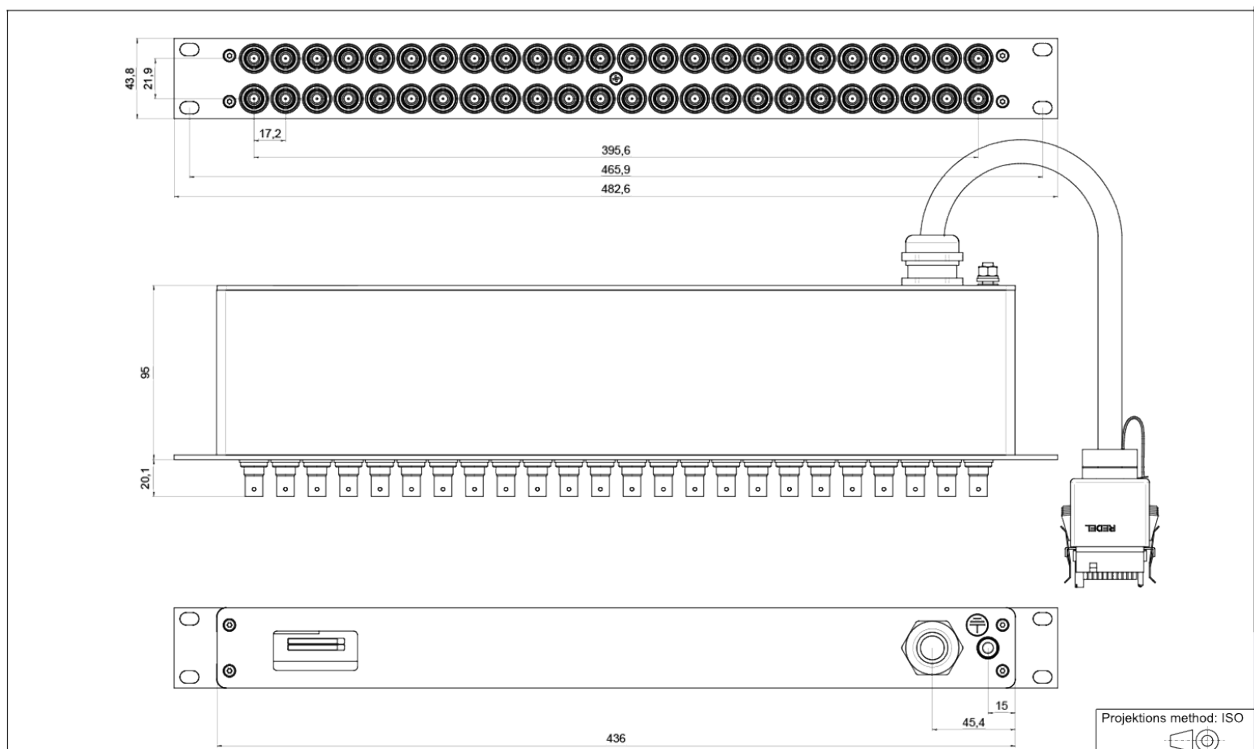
Dimensional drawing Break Out Box, 19" rack mountable version
